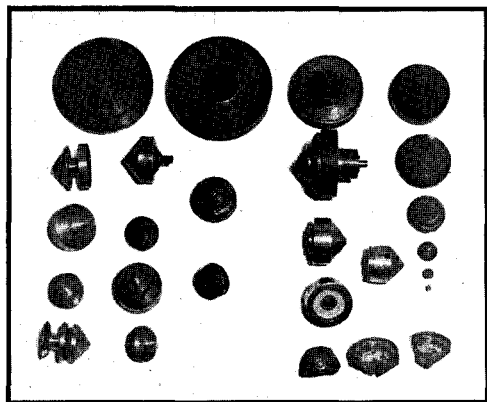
Miscellaneous collection of rotors. At bottom right are some pieces of exploded rotors.
